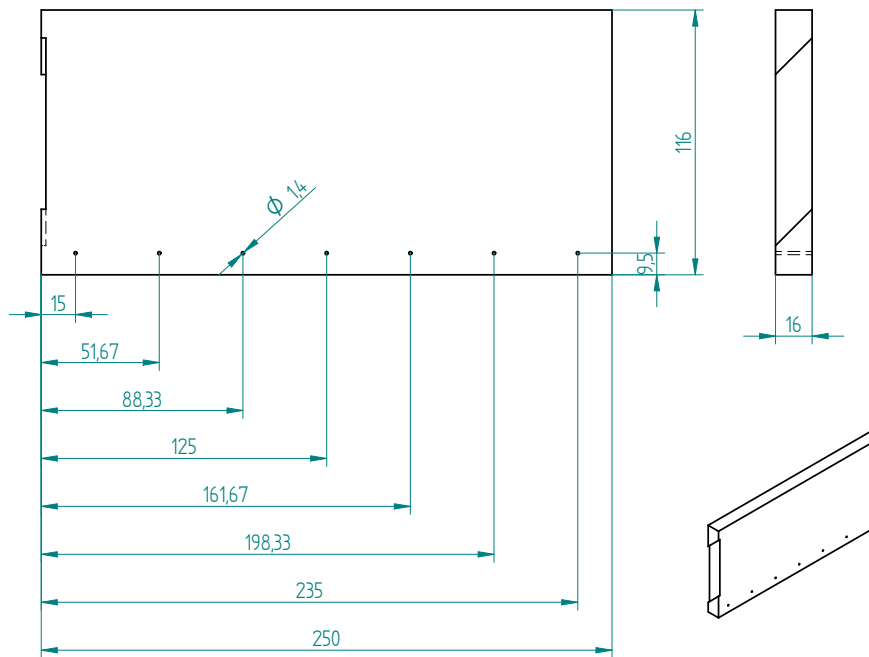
Shaped part : face-2 for perpendicular tool
